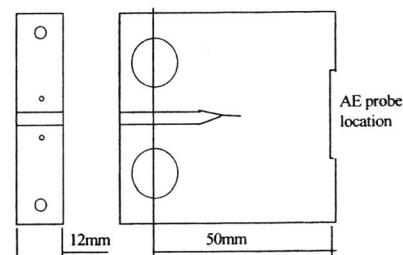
CTS Test specimen dimensions, $a/W = 0.375$. The machined hole at the back of the specimen locates the AE probe.
